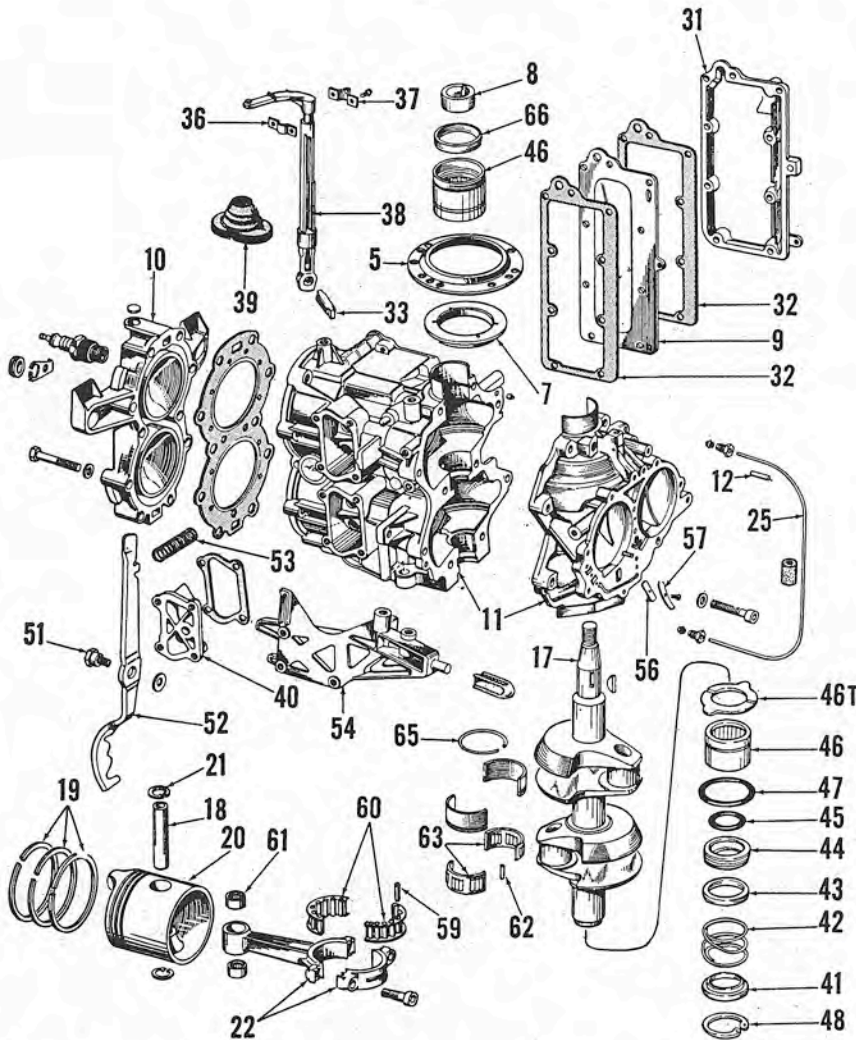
Exploded view of series FD power head assembly. On early models, lower main bearing (46) is bushing type cast into crankcase halves. Late models are equipped with a thermostat assembly similar to that shown (26 through 30) in Fig. J19. Refer to Fig. J19 for legend except for the following.
